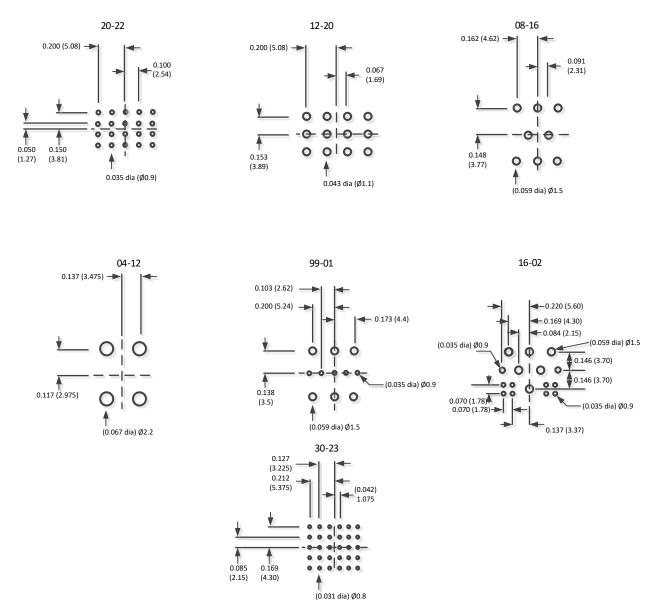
ARINC 800 PCB Layout Dimensions
